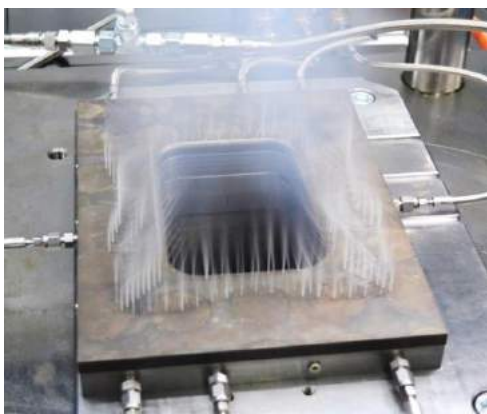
Free flow out of the CO_2 through laser-drilled microholes in the die of the deep drawing tool.
